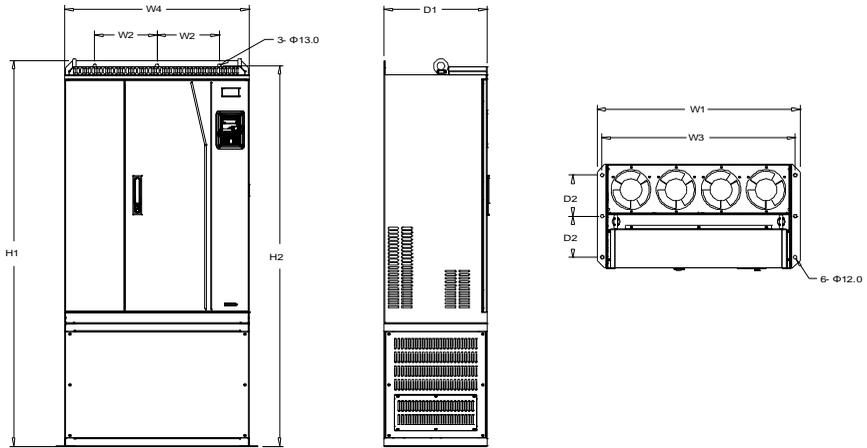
Floor installation diagram of inverters of 400 V, 220 to 315 kW
